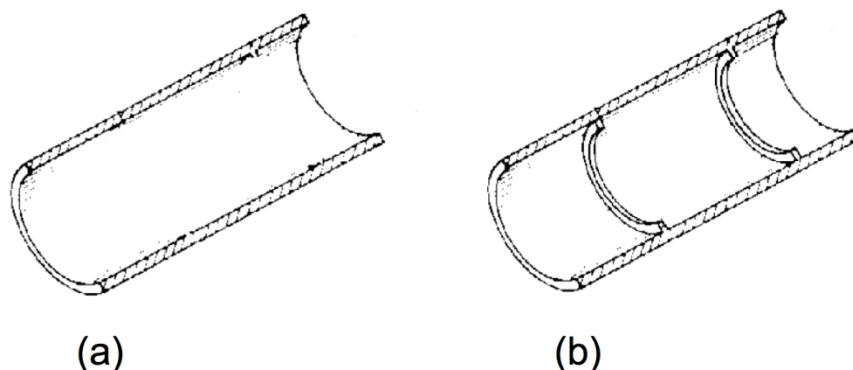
Tube Surface. (a) Smooth Tube, (b) Tube with Transverse Fins.
